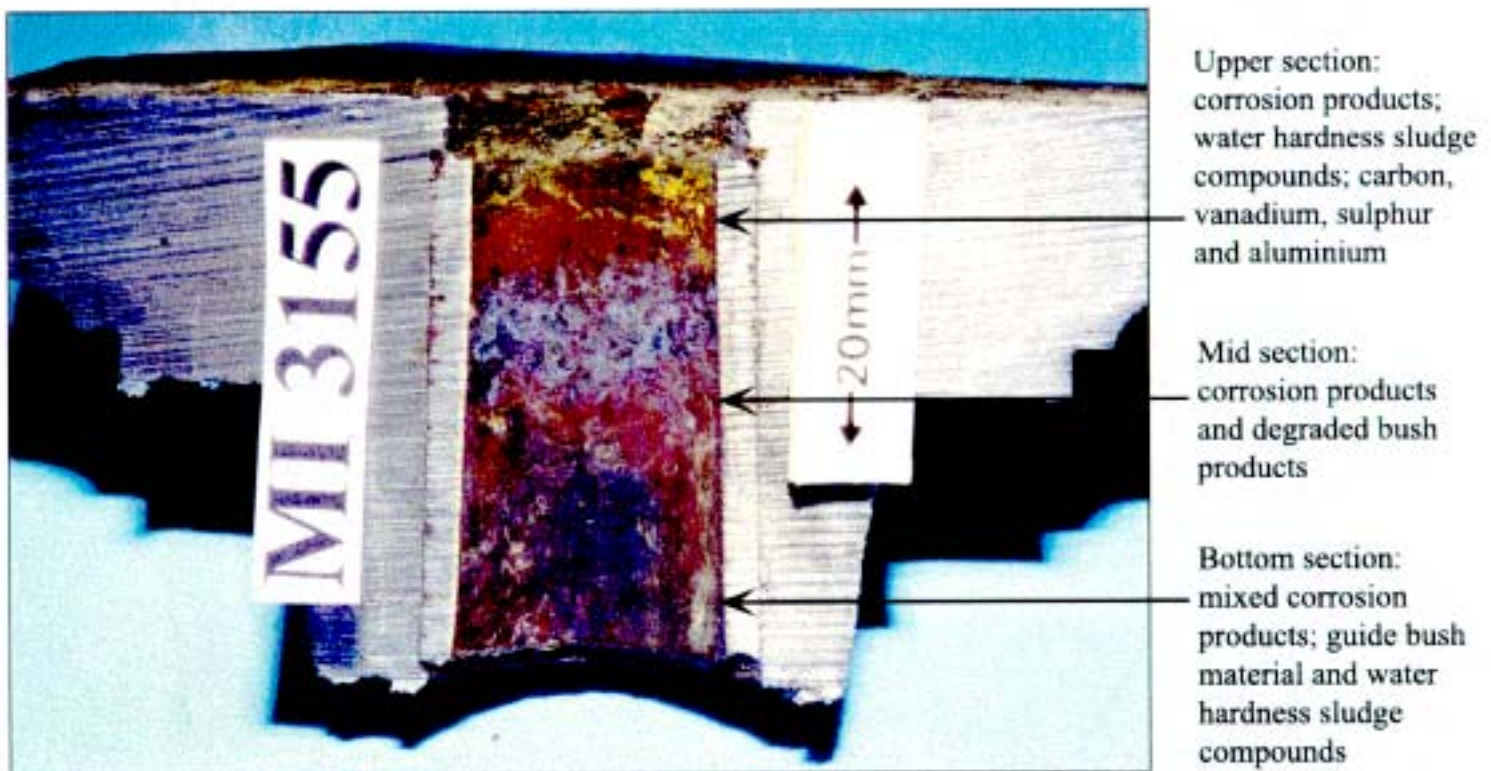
Aft side spindle guide bush - off centre longitudinal section
